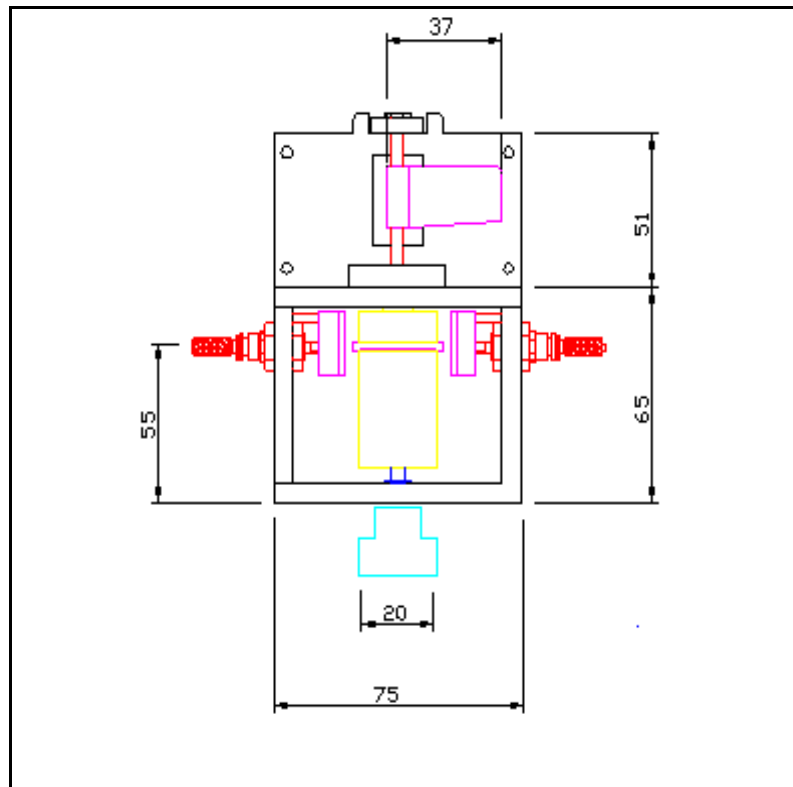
Dimensioned View of the Wiper Blade Tool
